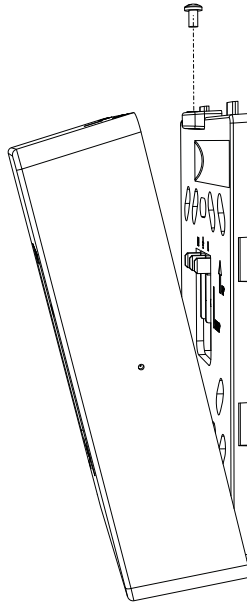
Mounting the Wireless Input/Output unit on the Mounting Plate
